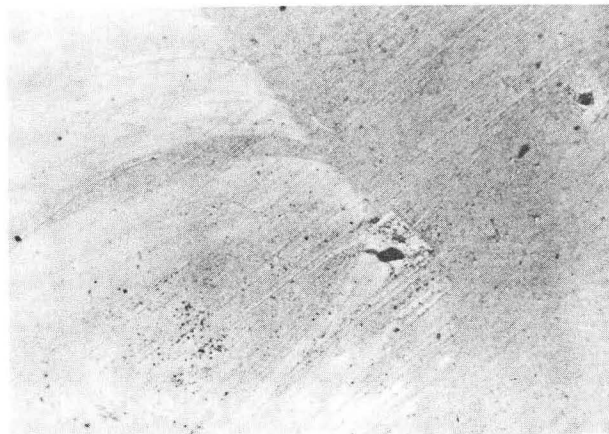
Fracture surface of polycarbonate SEN specimen tested at 323°K and 0.2 cm/min.
